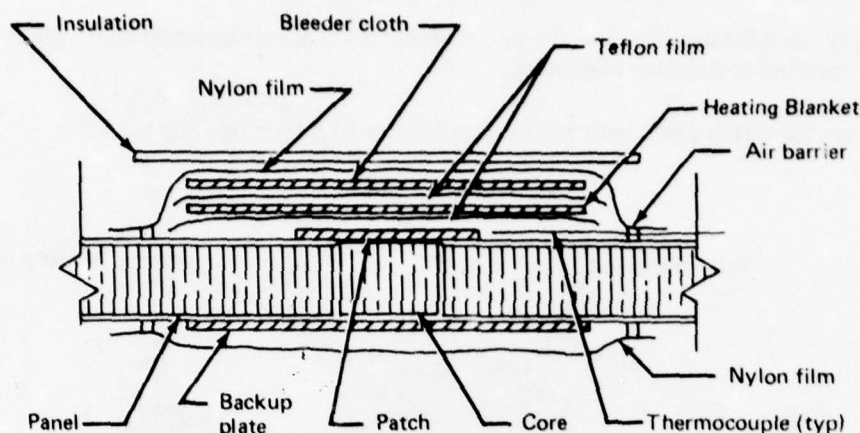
Typical Setup of Single Heating Blanket with Backup Pressure for Thin Sandwich Repair
